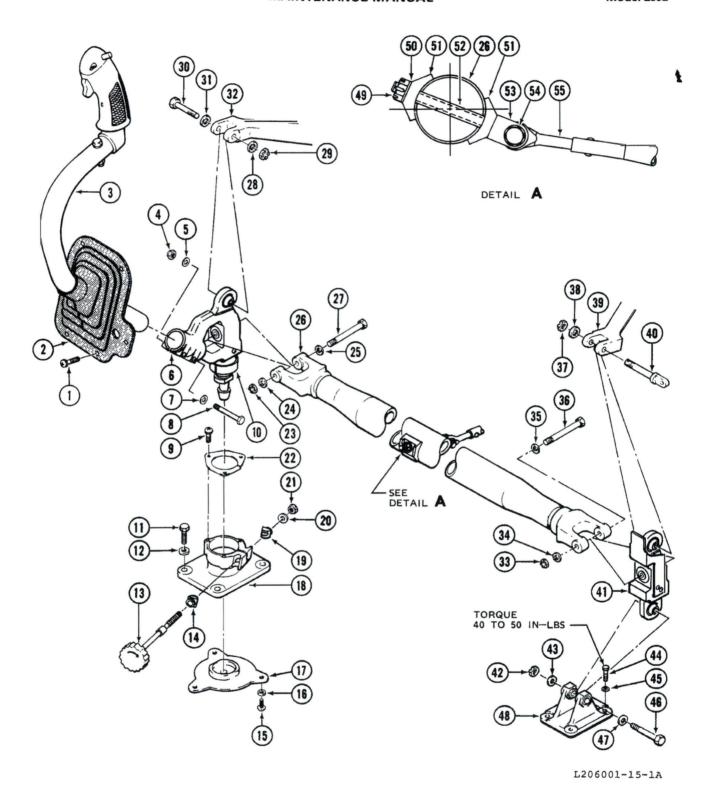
Cyclic stick and torque tube (Sheet 1 of 2)
